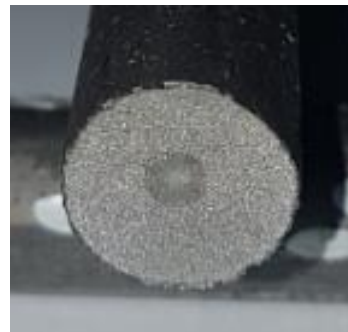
Brittle Fracture Surface (15,0 mm C82D)
